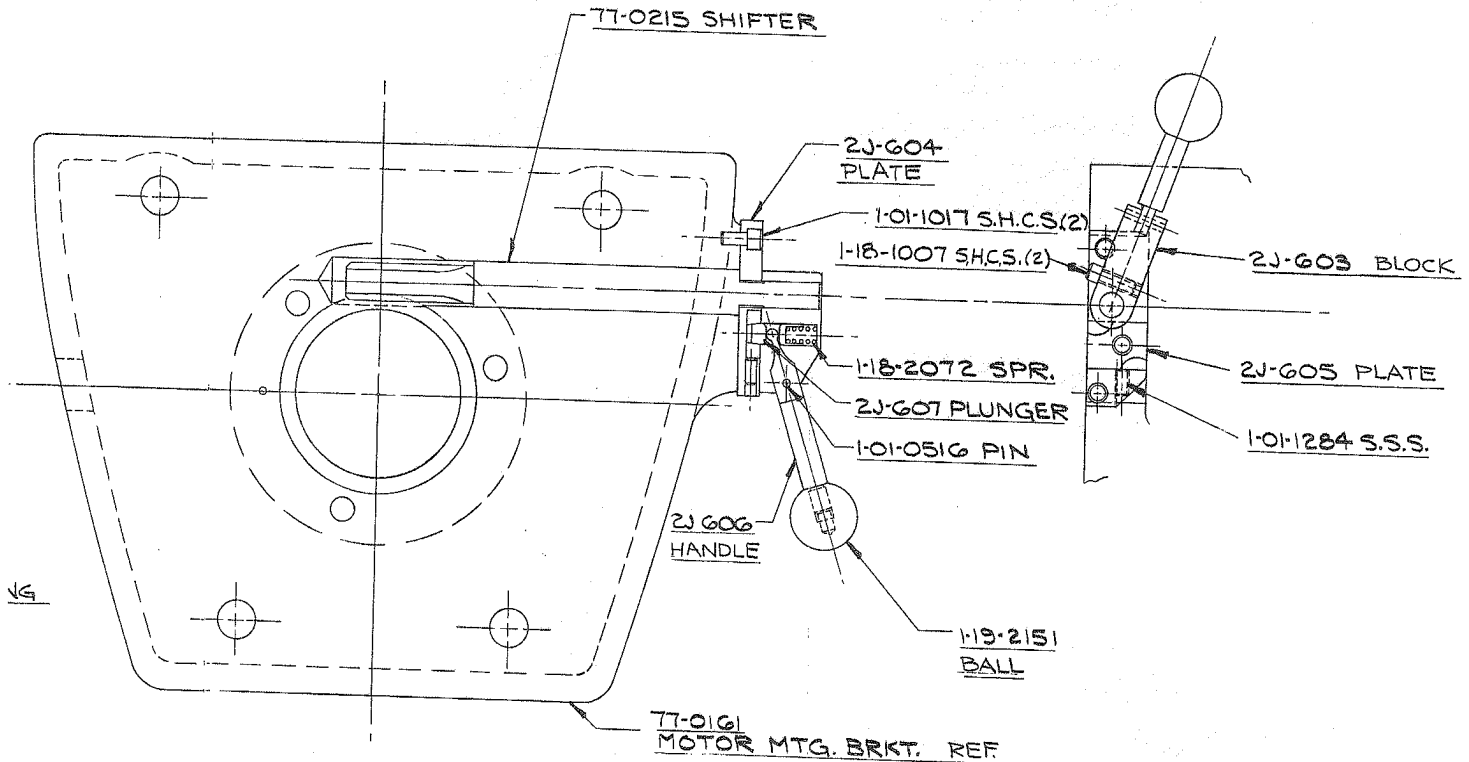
Series I CNC Head, R-Ram (Sheet
